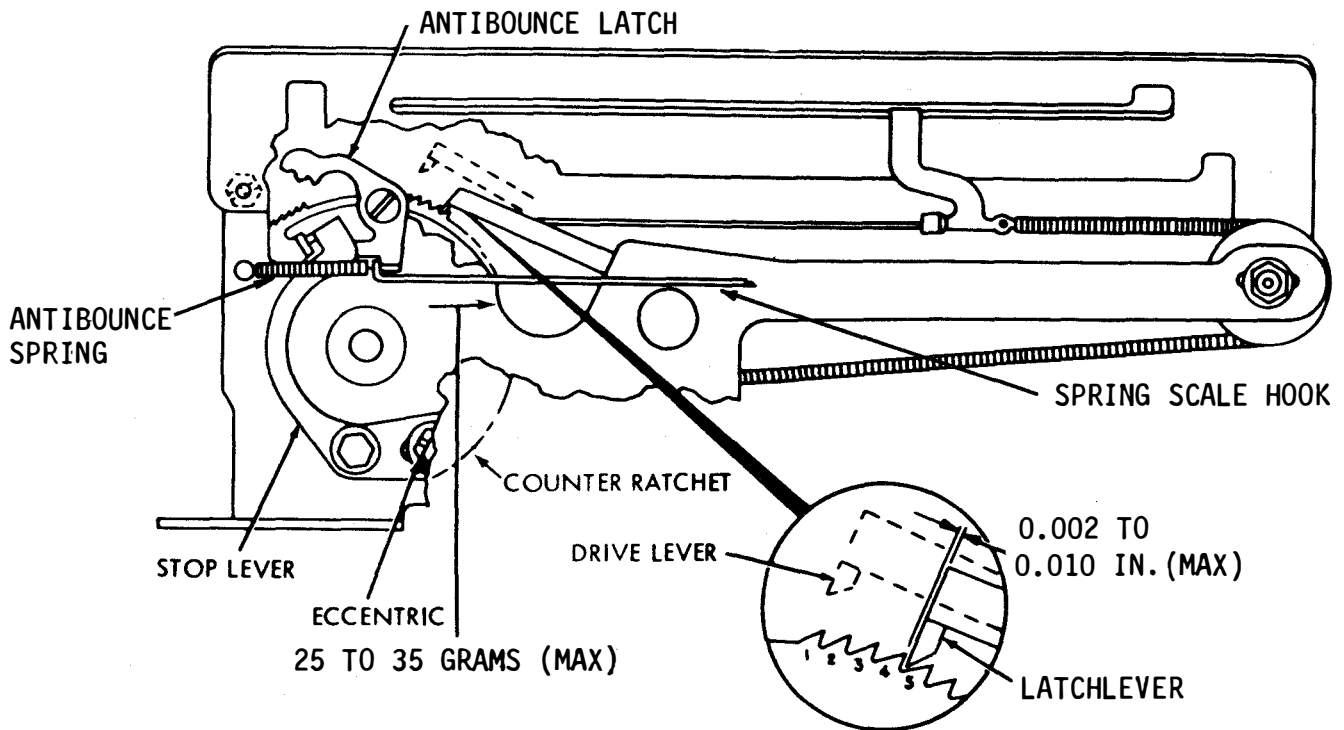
Antibounce Spring and Stop Lever, Rear View
